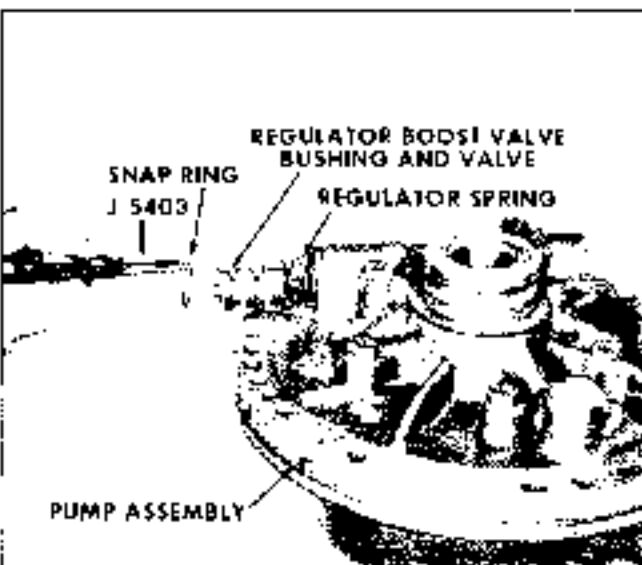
E-70 Removing Pump Regulator Valve Snap Ring
